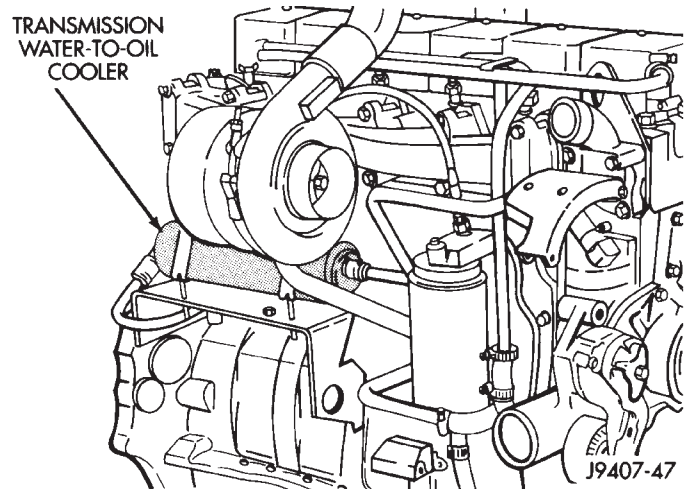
Transmission Water-To-Oil Cooler—Diesel Engine—Typical
